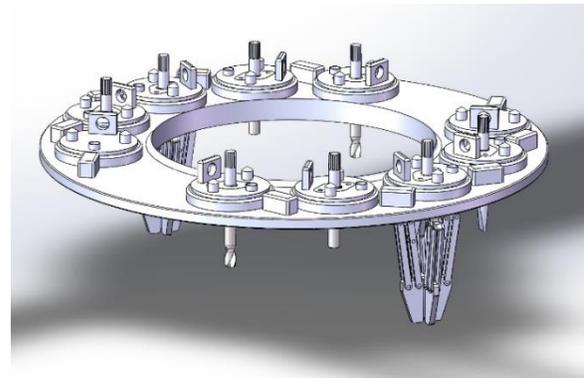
3D model of the tool holder which will house all 10 tools for the robotic arm.
